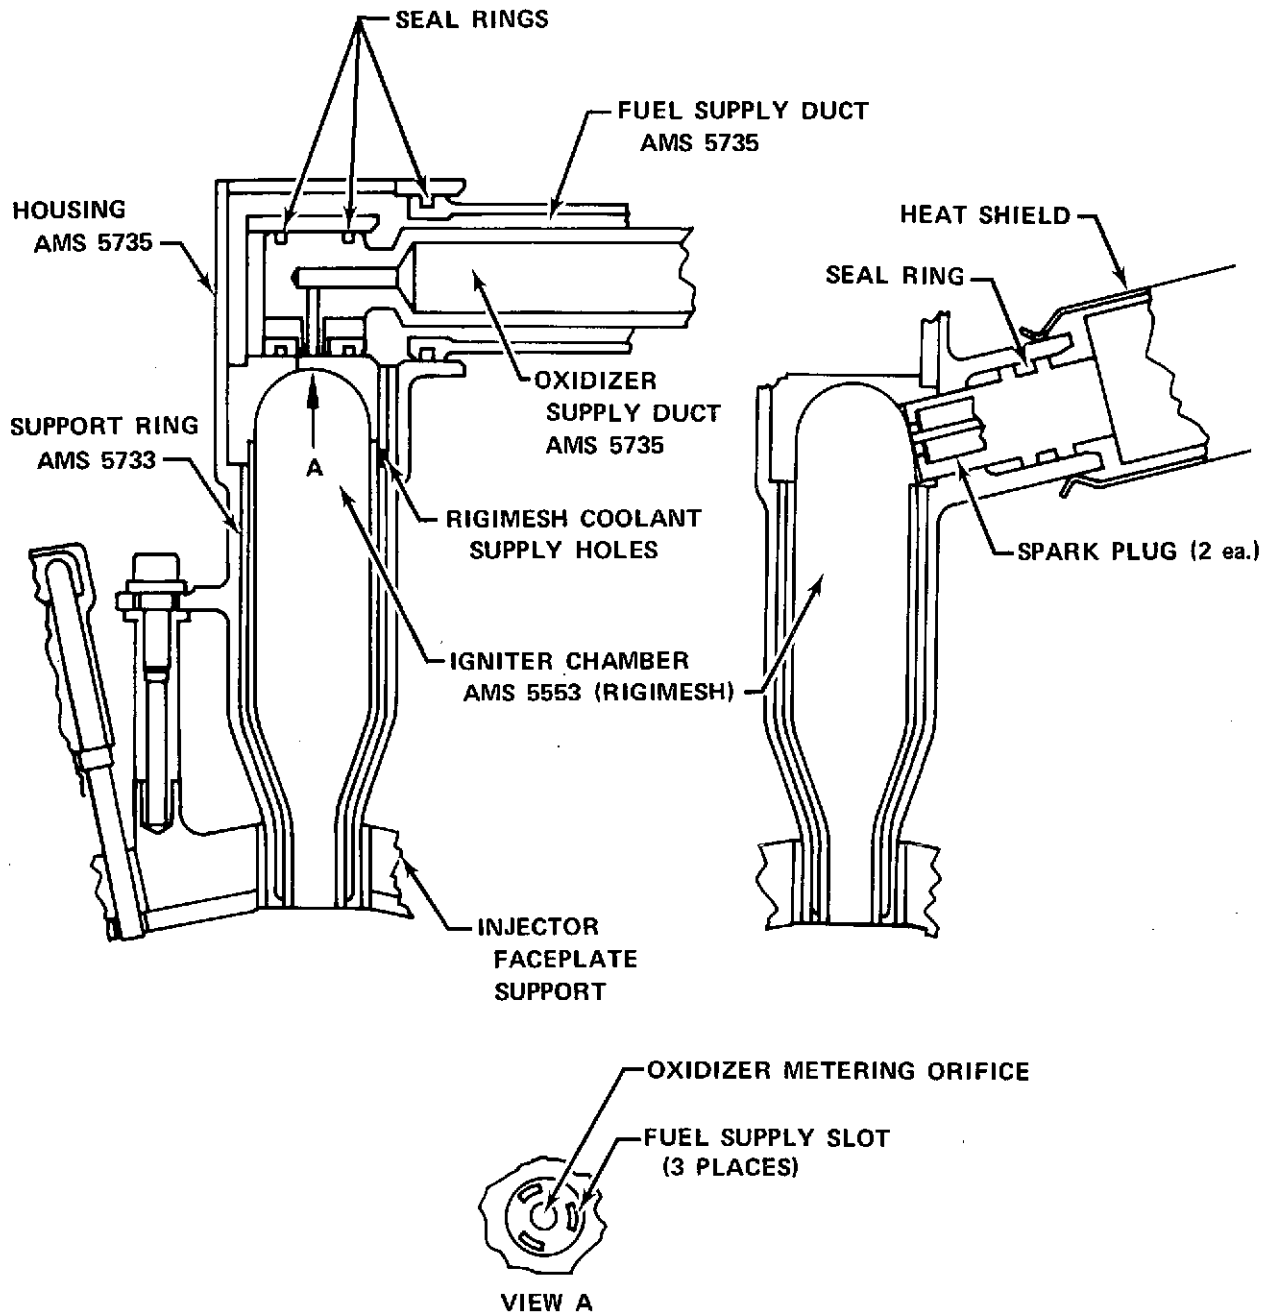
ASE Engine Main Burner Igniter Design FD 72395
